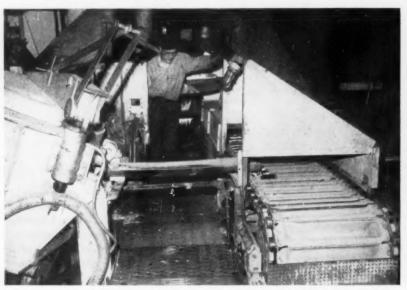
The molten aluminum runs through a fireclay-coated trough into ingot molds on conveyor. Furnaces melt and pour 5000 lb during each 8-hr shift.
